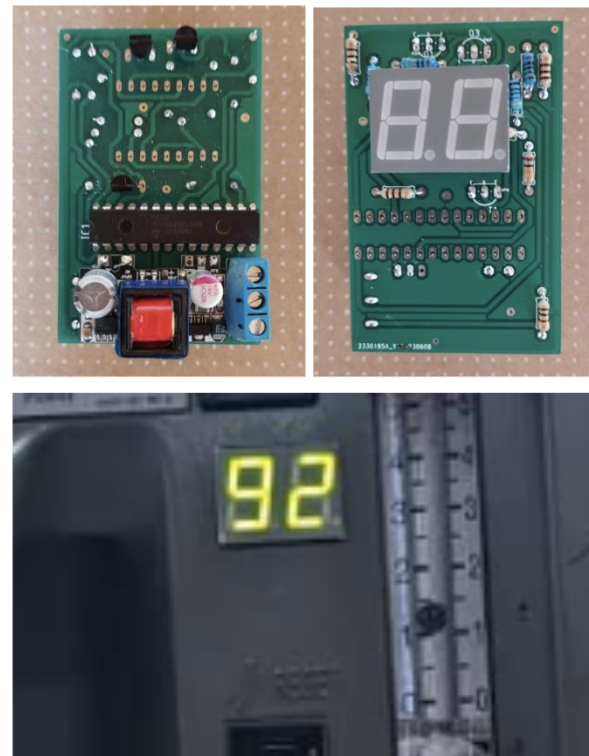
Display board back (top left), front (top right) and installed (bottom).
